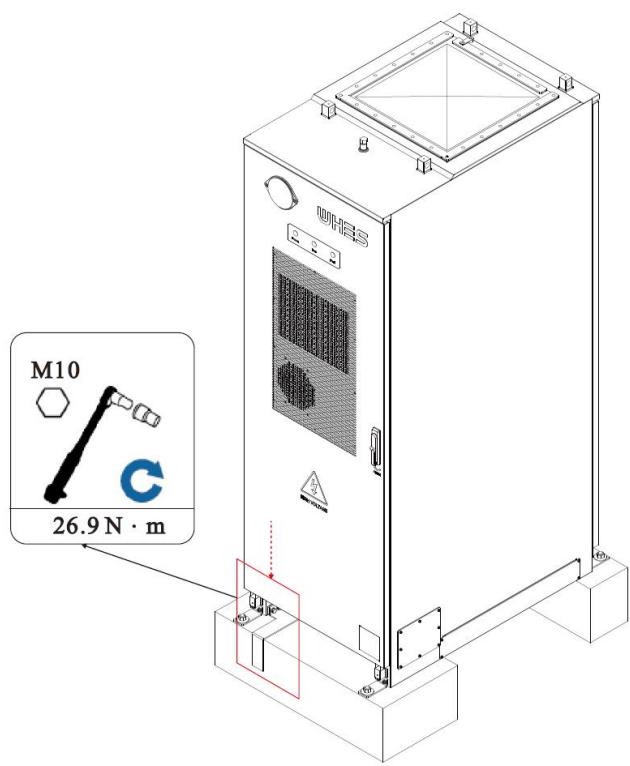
Fixing to the installation platform and installing the left and right cover plates
